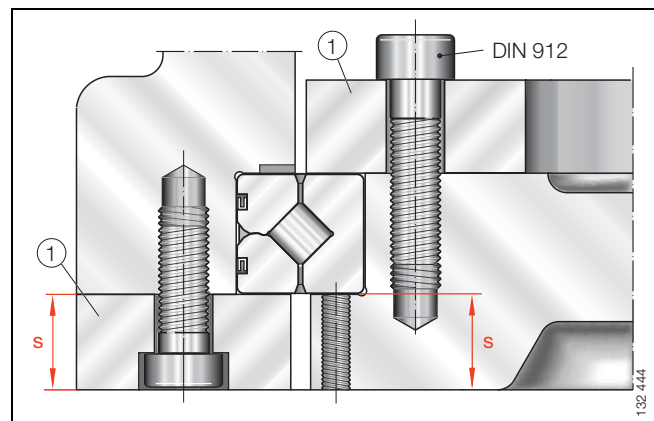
· Crossed roller bearing SX located by means of clamping rings
